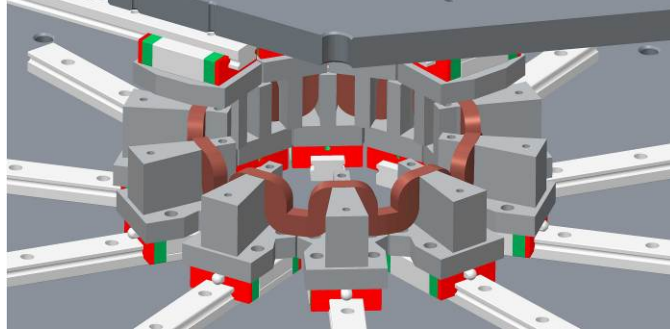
CAD-model of the winding forming machine with pneumatic cylinders [55].
